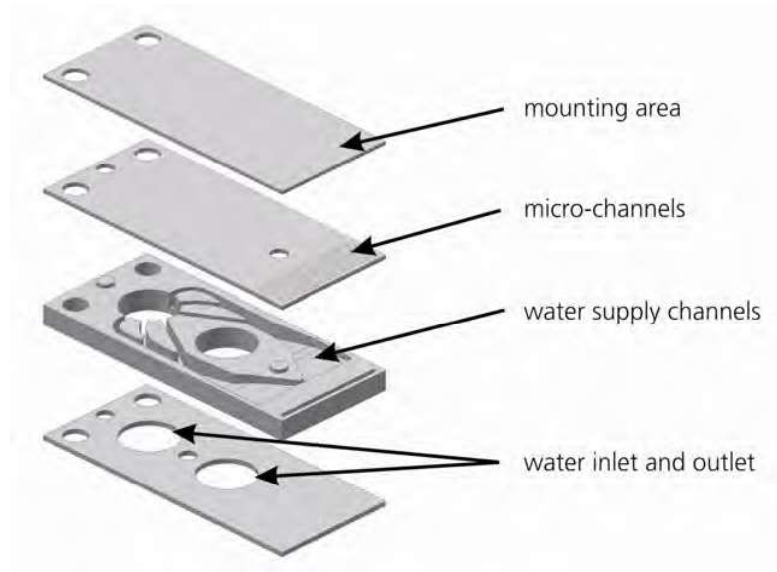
Schematic view of heat sink assembly. The different sheets are joined together by diffusion soldering.
